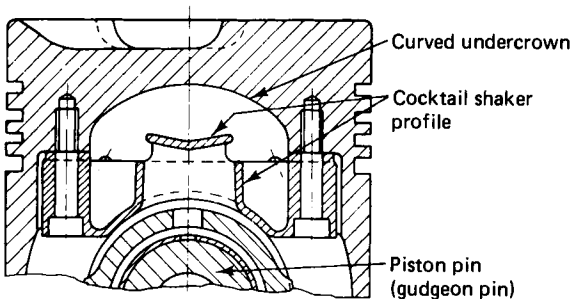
Upper part of cocktail-shaker piston; oil supply to the shaker is replenished while the engine is operating
